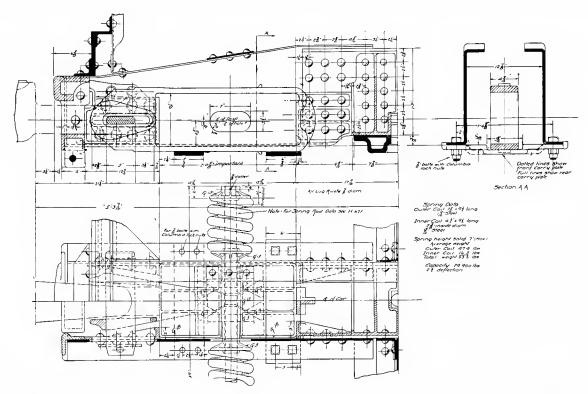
Cardwell Friction Draft Gear, Type G, Class 18, for New York Central & Hudson River Hopper Cars. Union Draft Gear Company.
